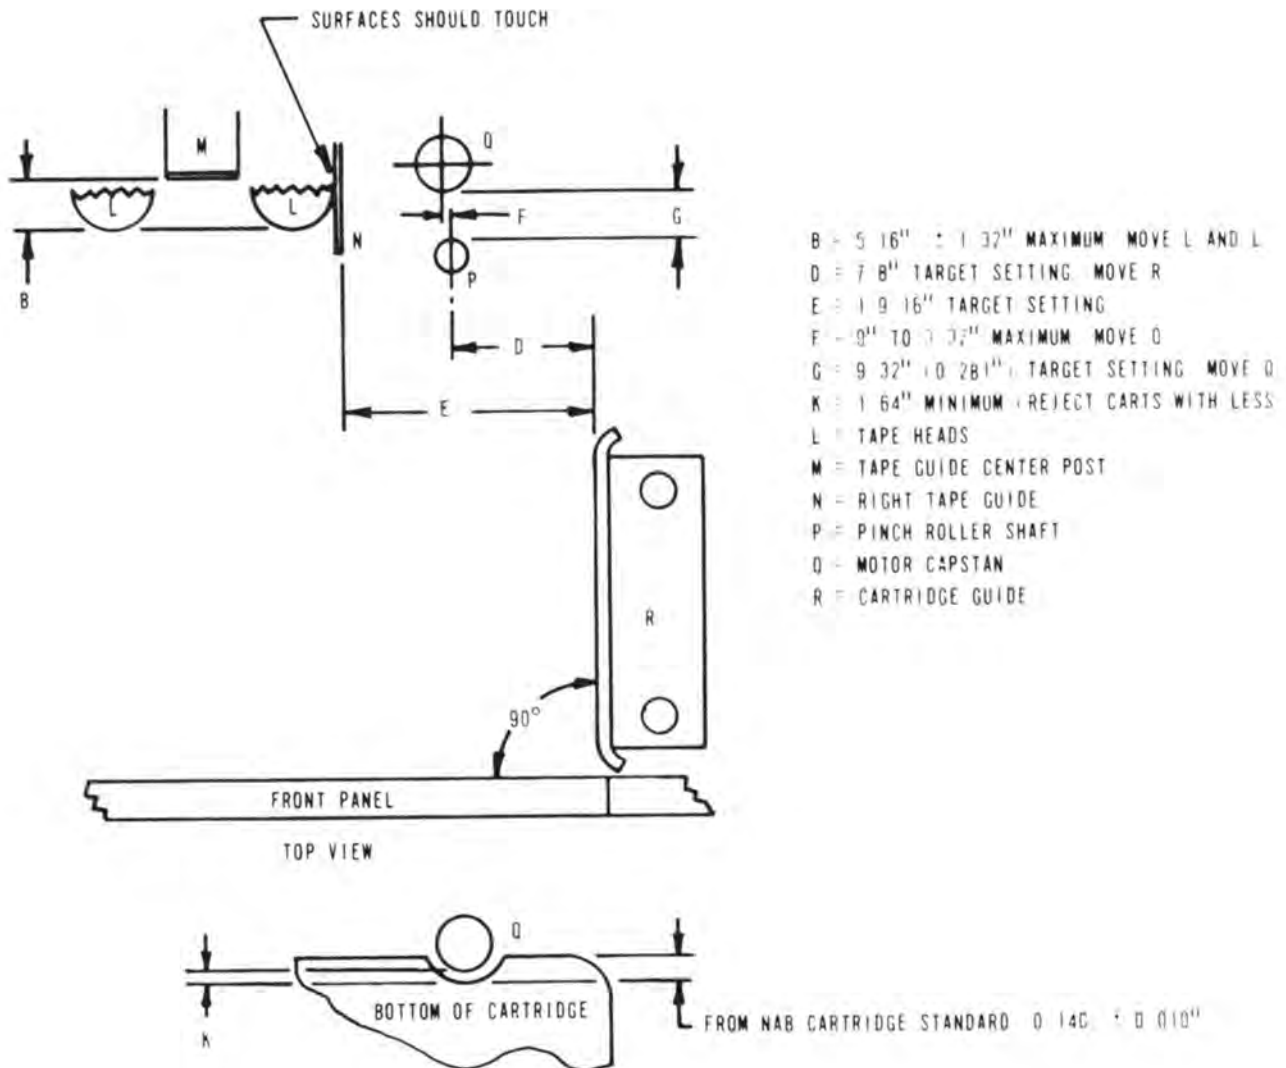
Criterion 90-1 and 90-2, Tape Deck Dimensions - 828 6862 001
